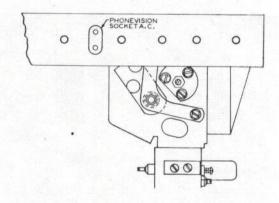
Tube and Trimmer Layout 24G22/23 Chassis.
